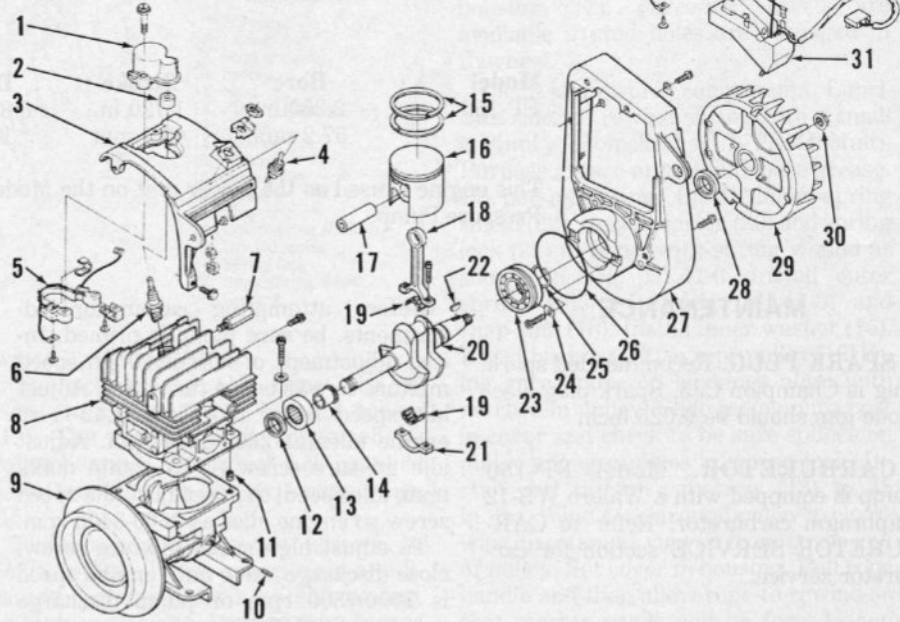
Exploded view of engine used on Model FP-150 pump.
